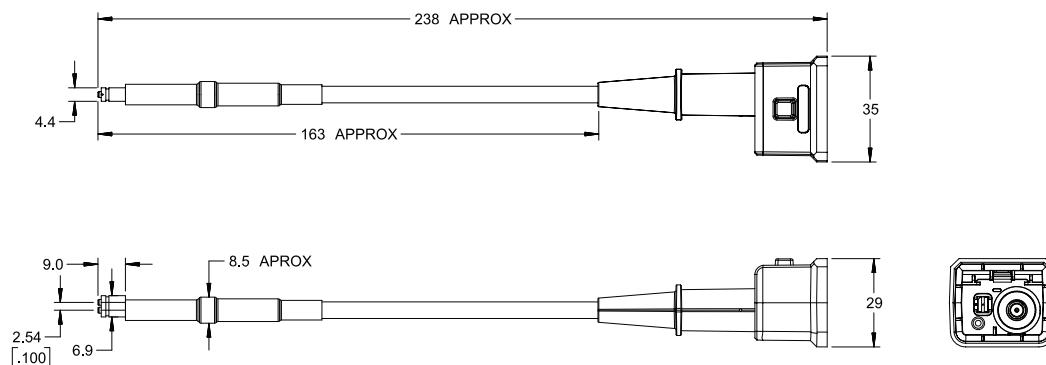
100 Mil Pitch Socket Probe Tip Dimensions
